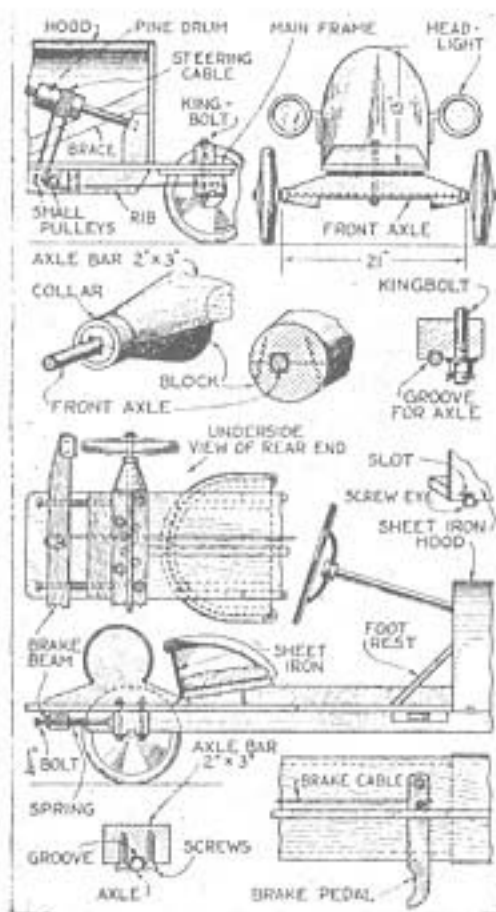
How front and rear axles, braking device, imitation gas tank, and other parts are made.
